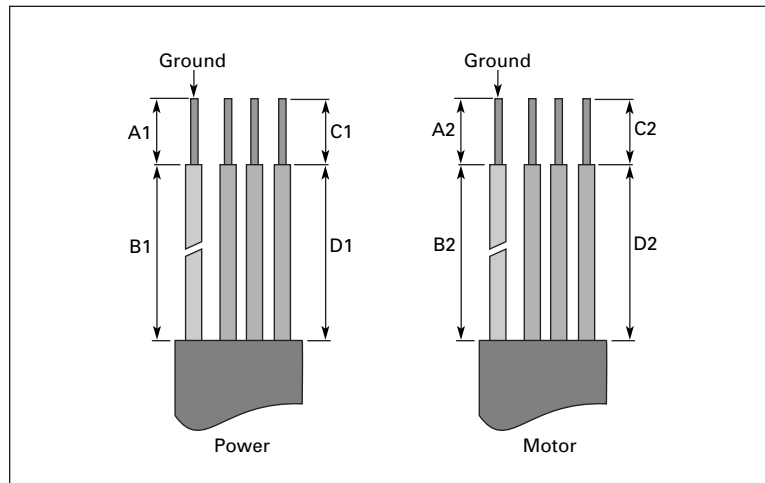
Input Power and Motor Cable Stripping and Wire Lengths
